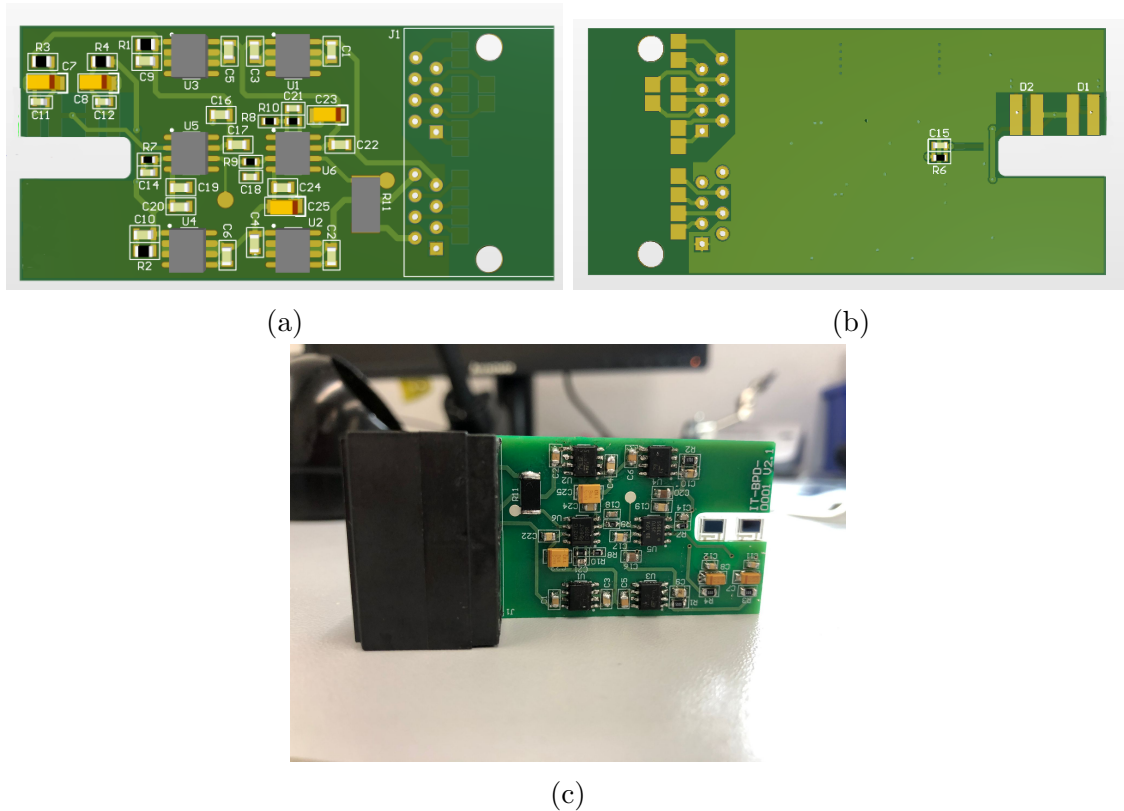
PCB board design of the initial home-made balanced photodetector design with (a) the front and (b) back design in the design program shown. (c) An image of the soldered balanced photodetector.
